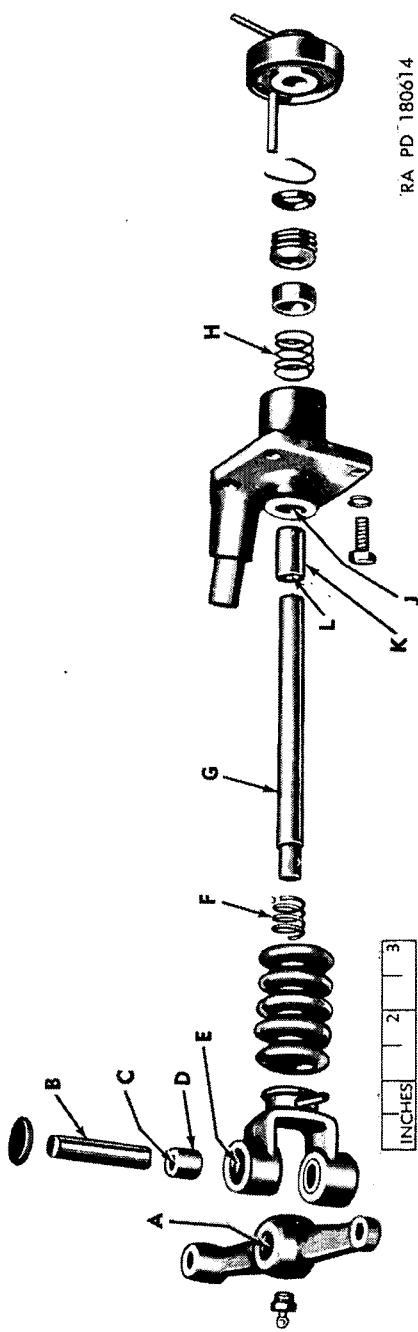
Repair and rebuild standard points of measurement for hydraulic governor piston head assembly.
